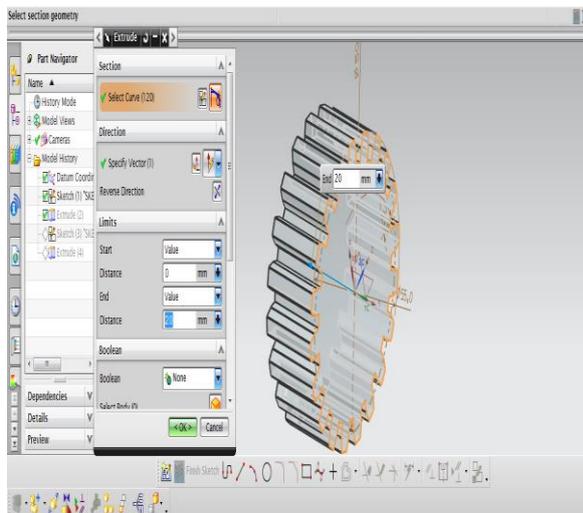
Extrude of above 2Dsketch of Reverted gear
